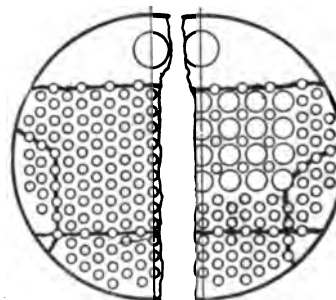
PATCHES WELDED IN FRONT AND BACK FLUE SHEETS.
